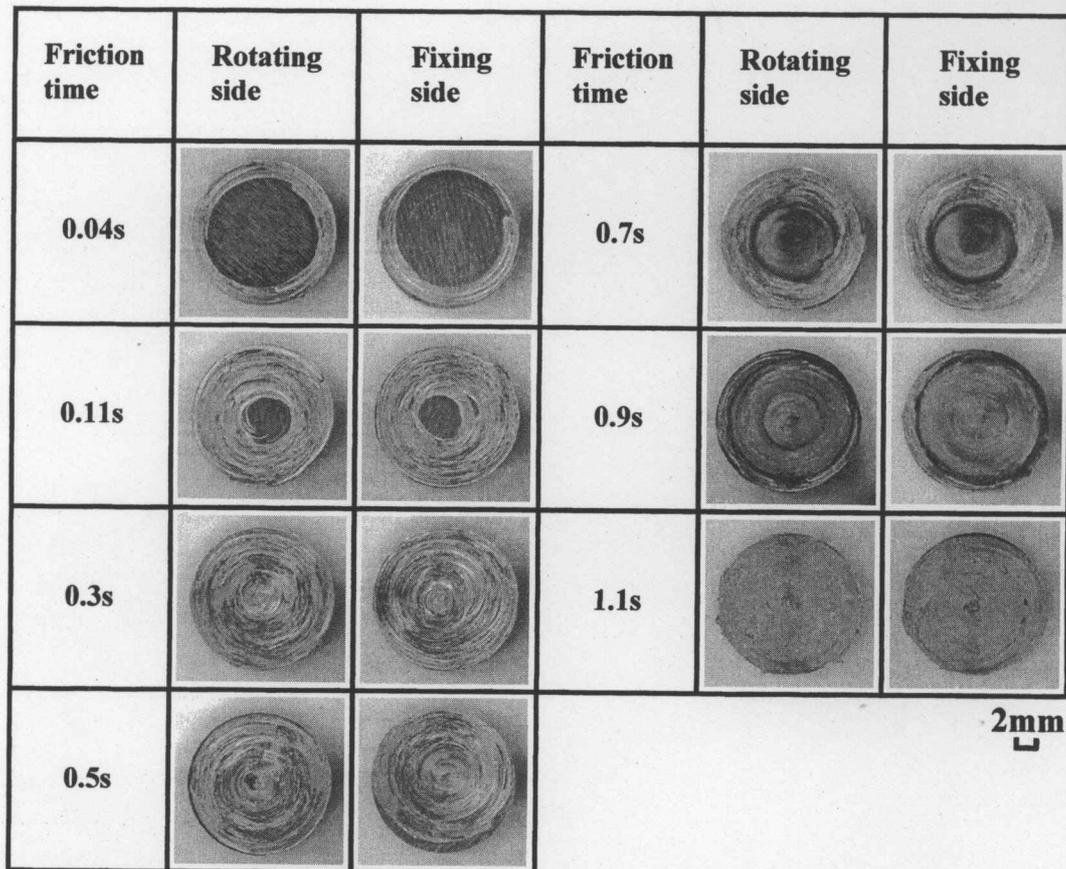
Appearances of welded interfaces after welding in friction pressure 30 MPa and friction speed 27.5 s^{-1}
